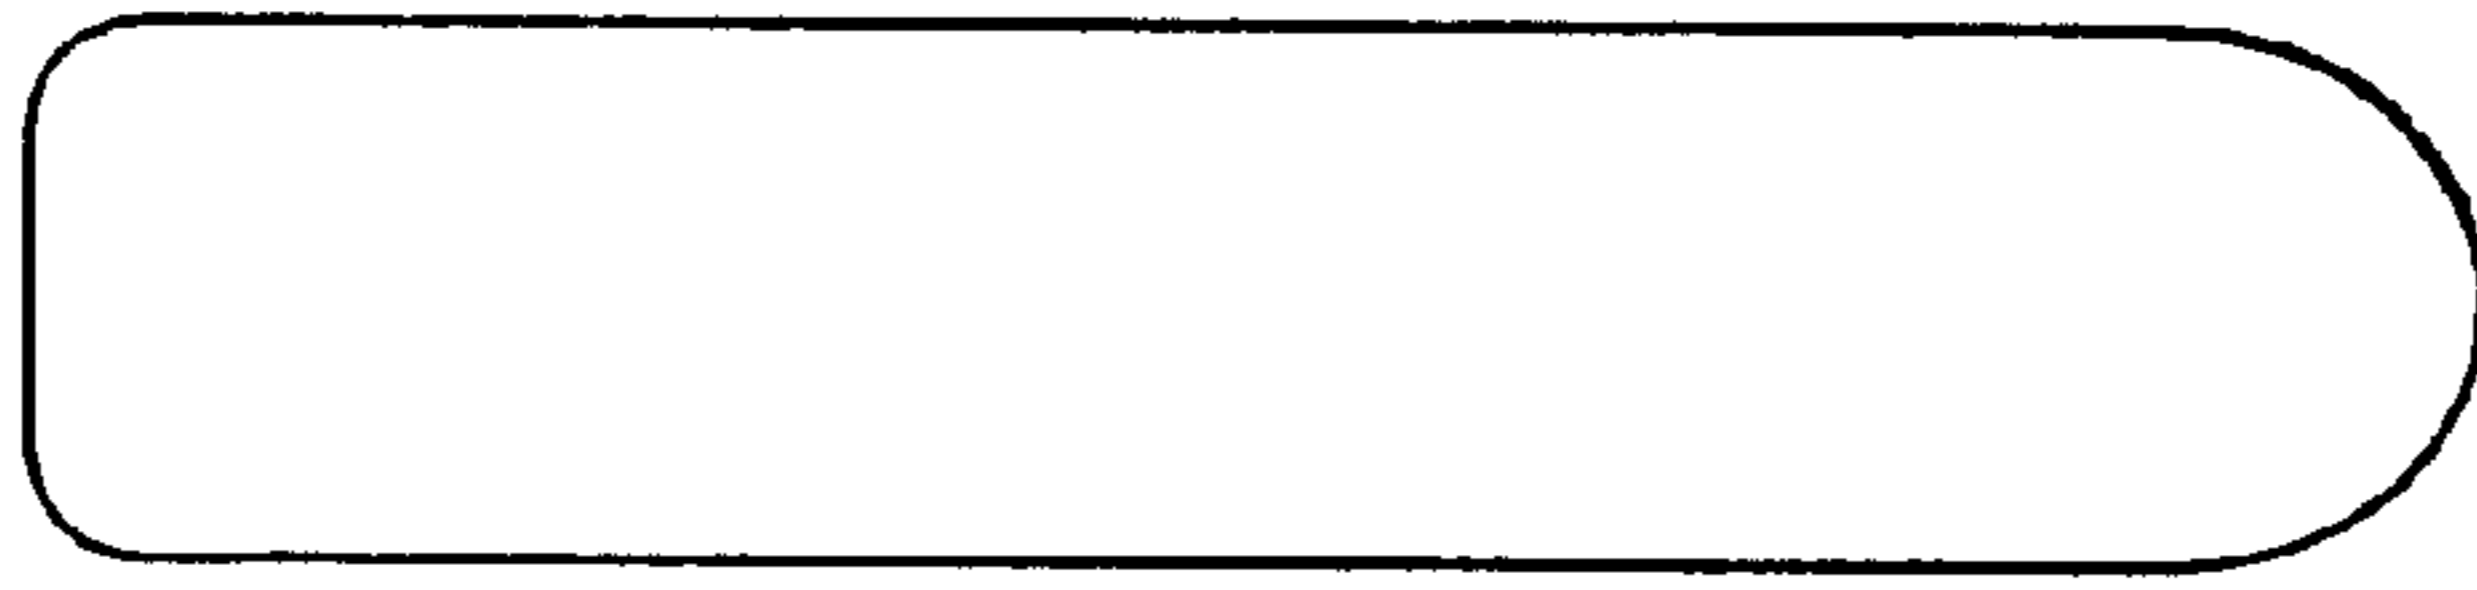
is an oblique perspective view of the cheese cutter; FIG. 2 is a right side view of the cheese cutter, as shown in FIG. 1; FIG. 3 is a left side view of the cheese cutter; FIG. 4 is a front side view of the cheese cutter; FIG. 5 is a back side view of the cheese cutter; FIG. 6 is a top view of the cheese cutter; and, FIG. 7 is a bottom view of the cheese cutter.
